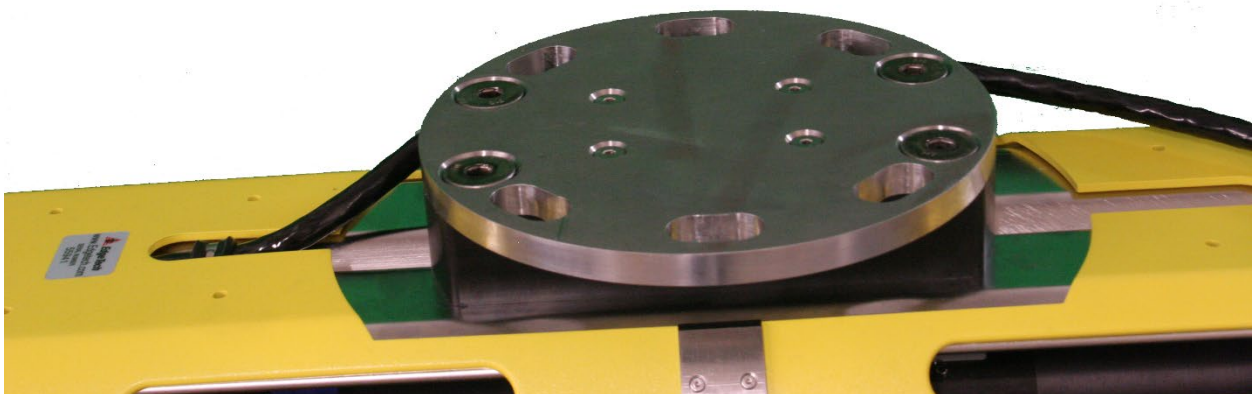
The Optional Adaptor Flange Installed onto the Mounting Plate
